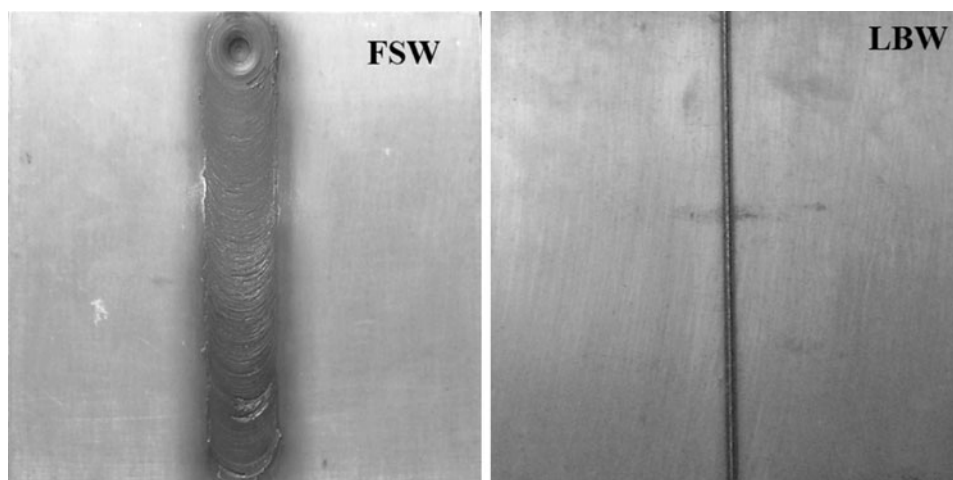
Fabricated joints of 409M ferritic stainless steel
